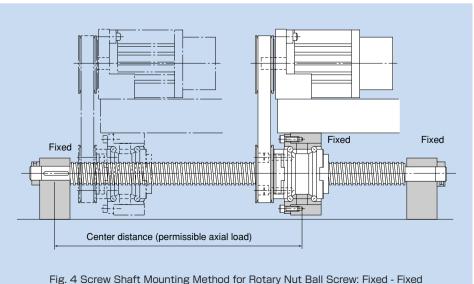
Screw Shaft Mounting Method for Rotary Nut Ball Screw: Fixed - Fixed
